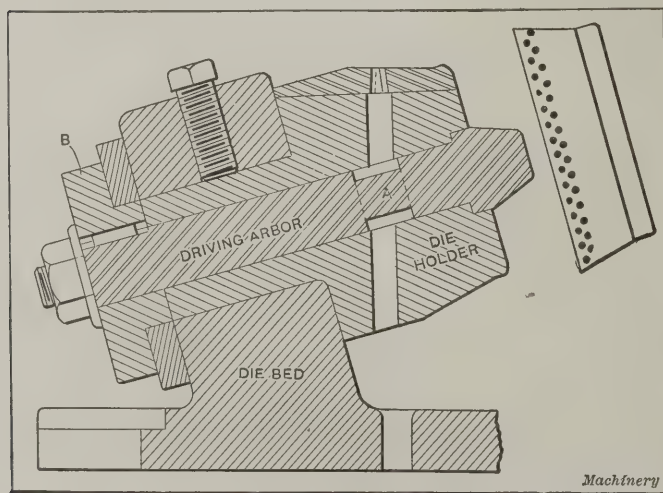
Die, Die Bed and Holder for a Tapered Shell
